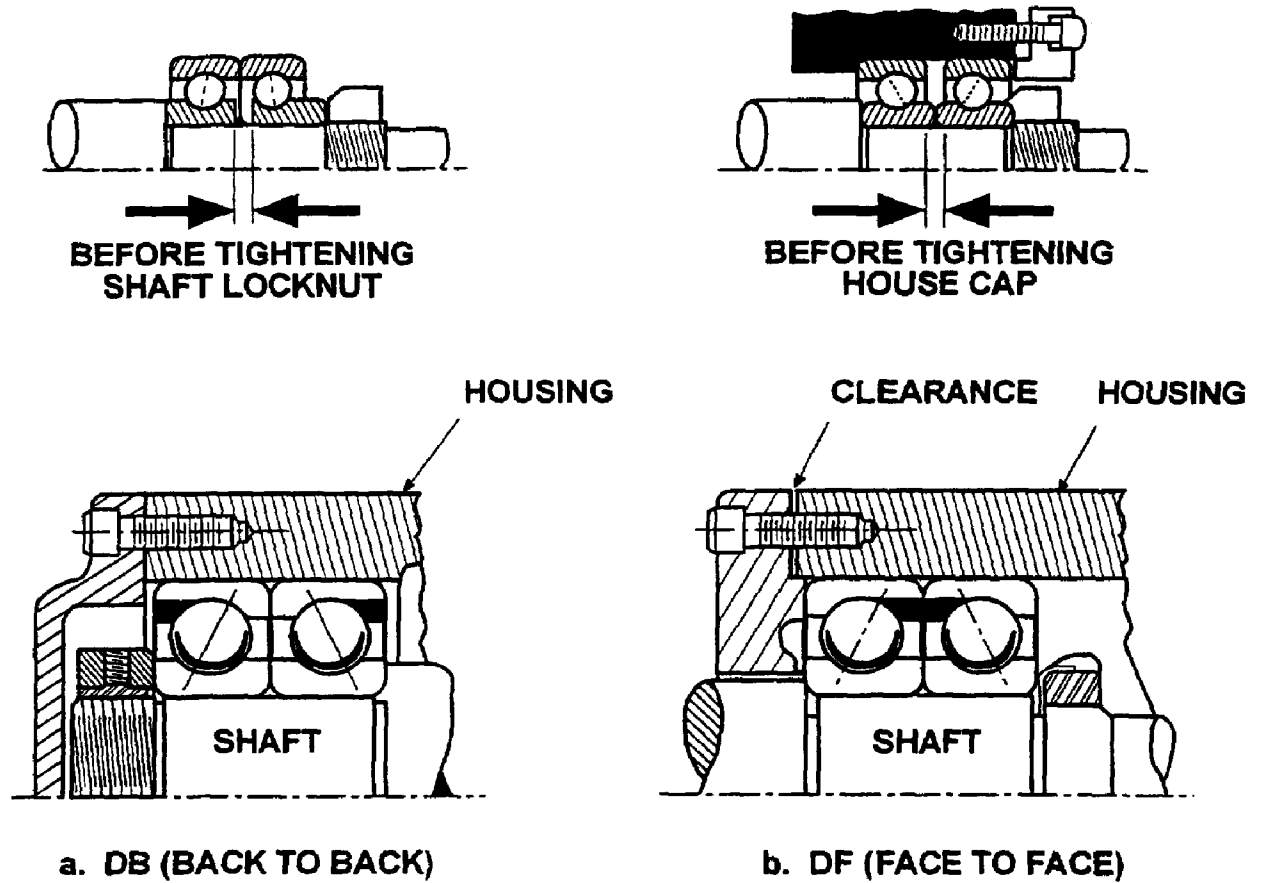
Duplex Bearing Arrangements Showing Relation of the Outer Ring Faces
